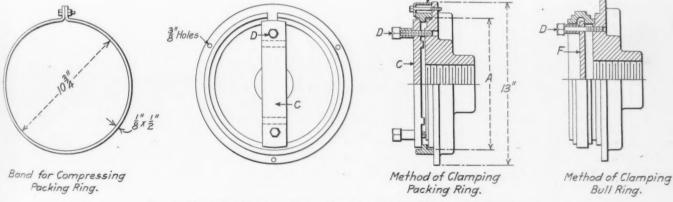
Chuck for Finishing Valve Chamber Packing Rings and Bull Rings
